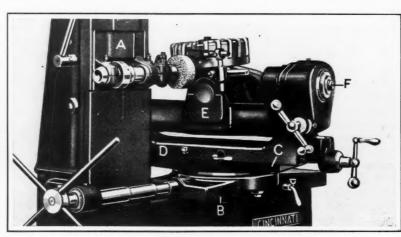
Set-up of Machine for grinding the Periphery of a Face Milling Cutter of the Inserted-blade Type
